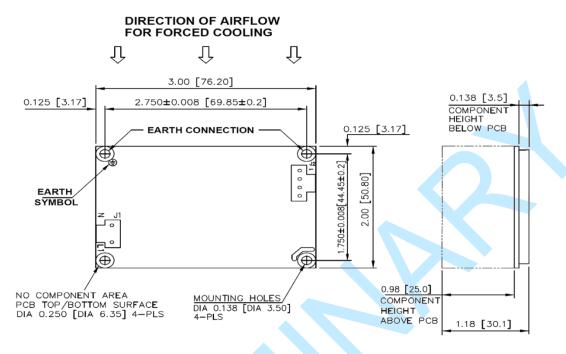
Mechanical Drawing - Screw Terminal (Option 1)
